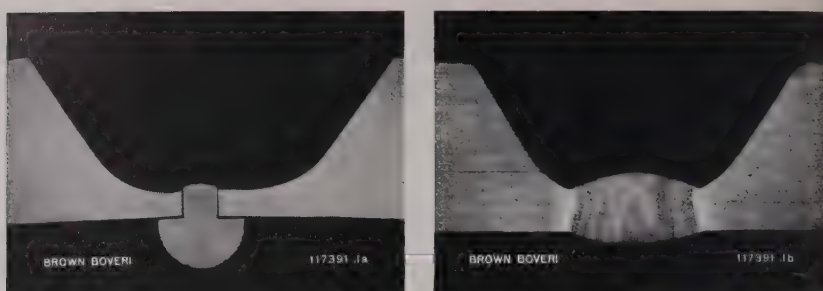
Macrographs of a sealing weld between tubes of Cr-Ni 18/8 welded by the EB Weld process
